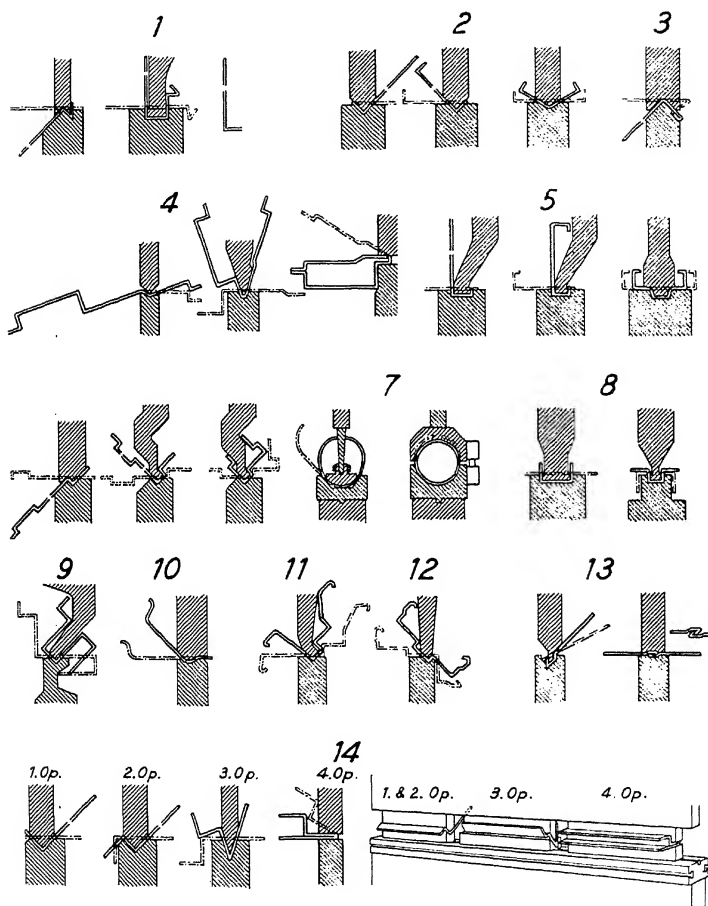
SECTIONS MADE ON FOLDING PRESS.
